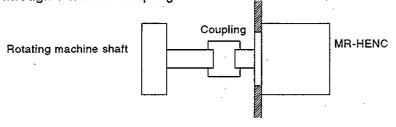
Connecting the Encoder to a Machine Shaft
